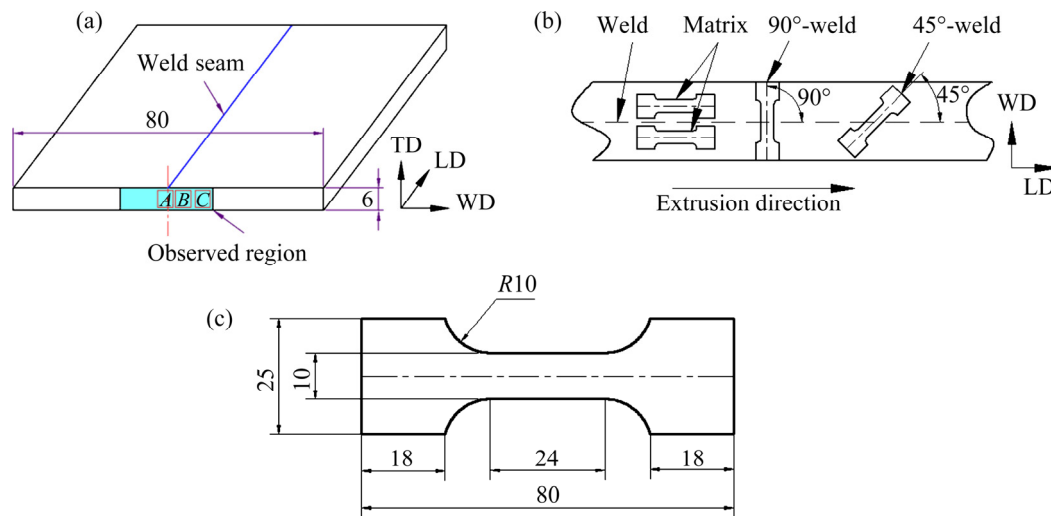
Positions and dimensions of tensile specimens: (a) Cross-section of product; (b) Positions of specimens; (c) Dimensions of specimens (unit: mm)
